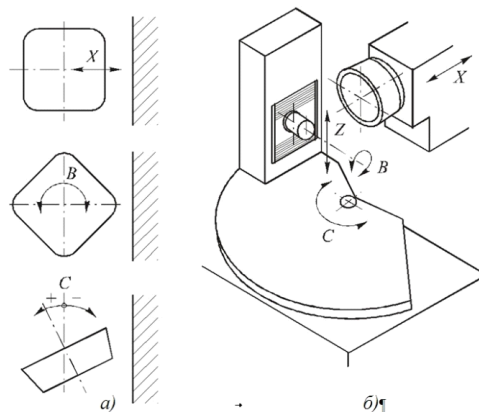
Shape forming movements in grinding back surfaces of inserts on CNC machines:
